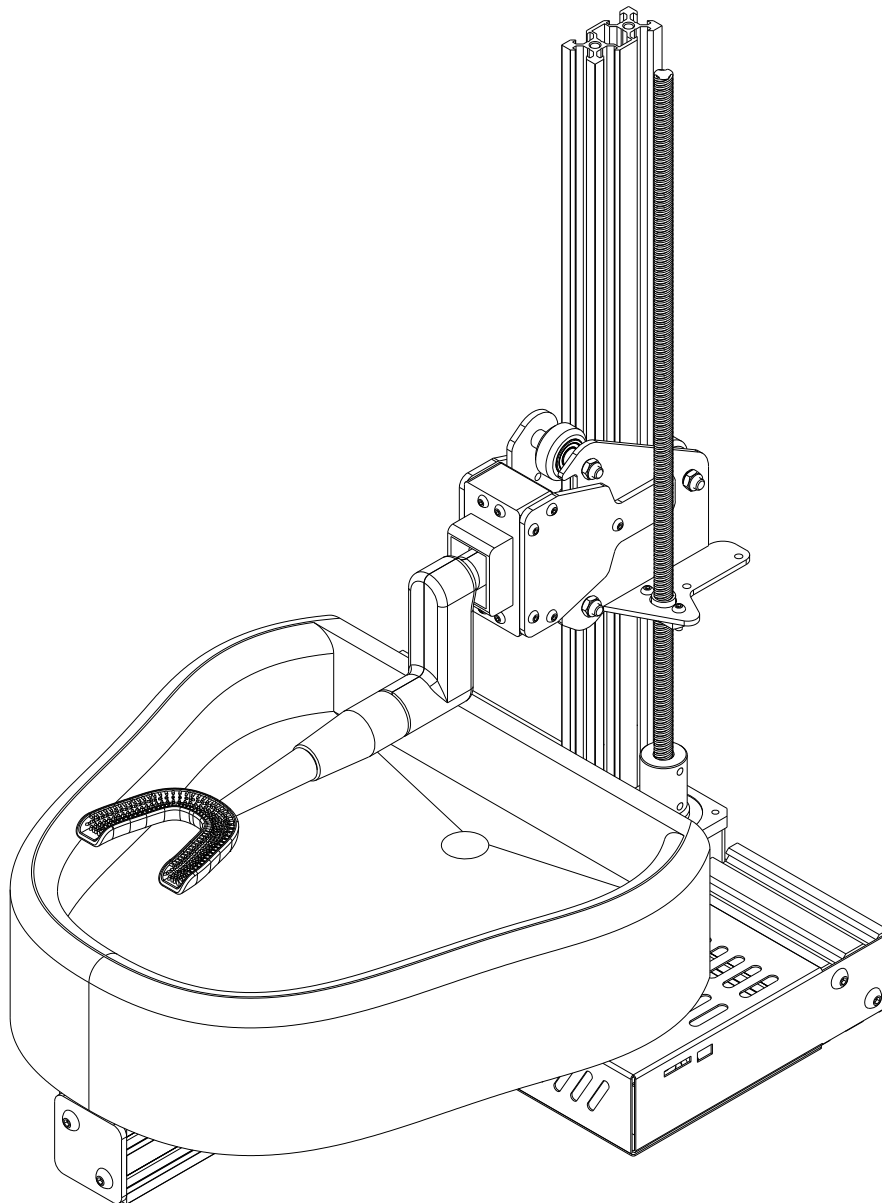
Assembly without Protective Wall and Ingress Protection Belt
